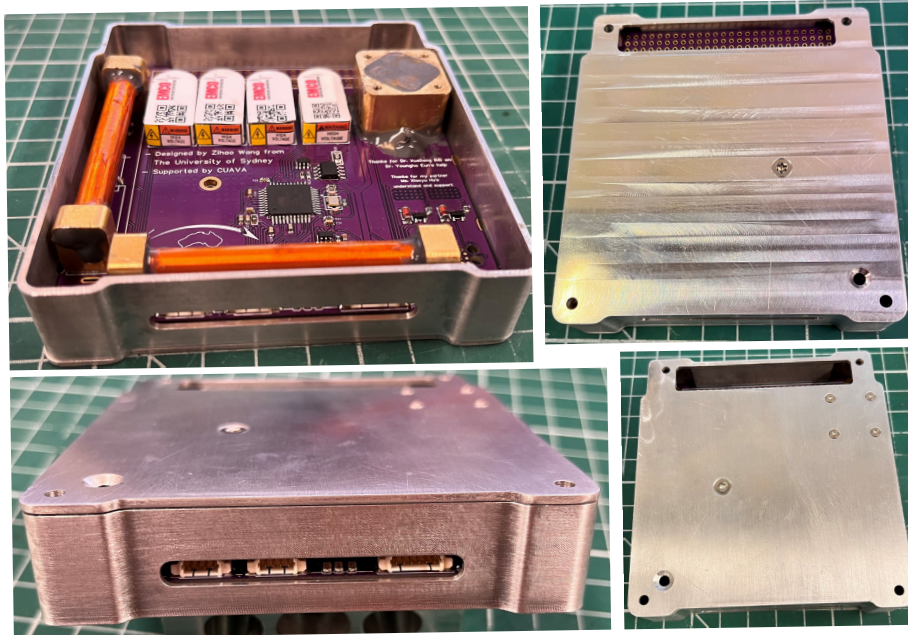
Photos of the assembly of the aluminium box with EPM board.
